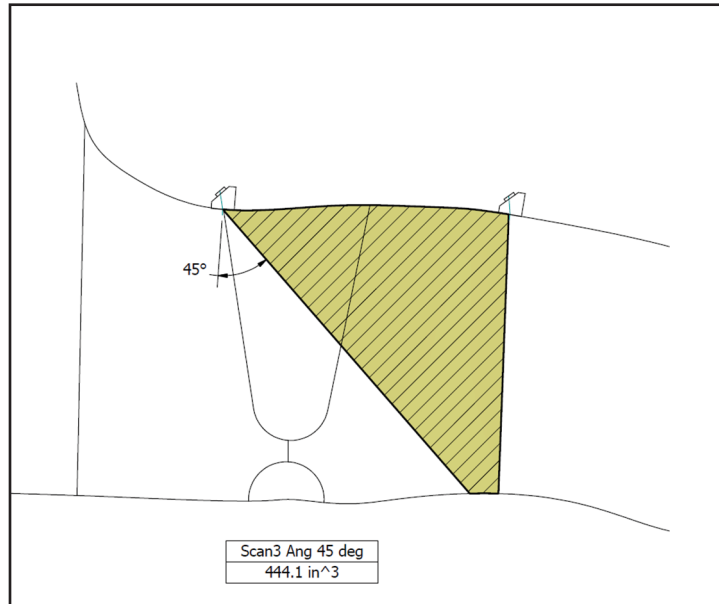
Weld RCW-21, 45° Nozzle Side Axial Scan
